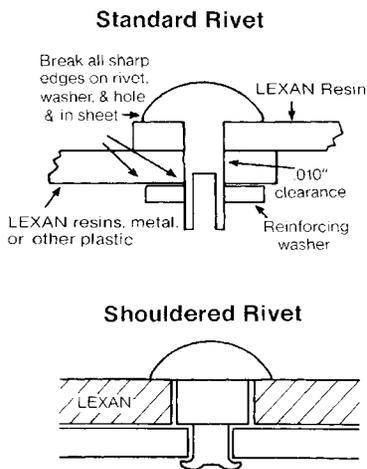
Standard rivet and shoulder rivet design for Lexan polycarbonate.
